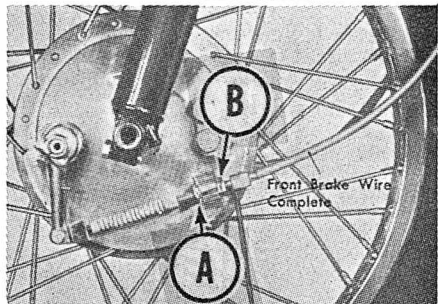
Some front and rear brakes are adjusted at cable guides shown at (B) after locknut (A) is loosened.
